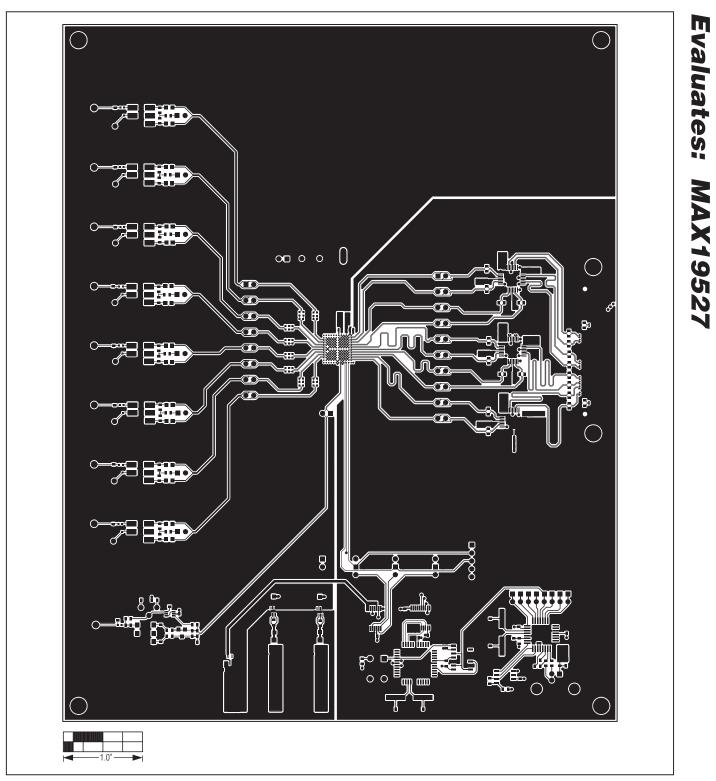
MAX19527 EV Kit PCB Layout—Component Side
